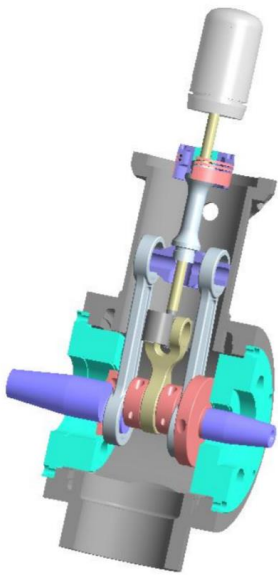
Displacer, displacer rod and small crosshead mounted on connecting rod
